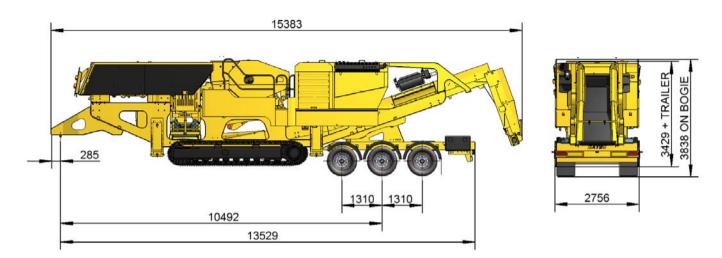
C-12⁺ Crusher Transport Dimensions
